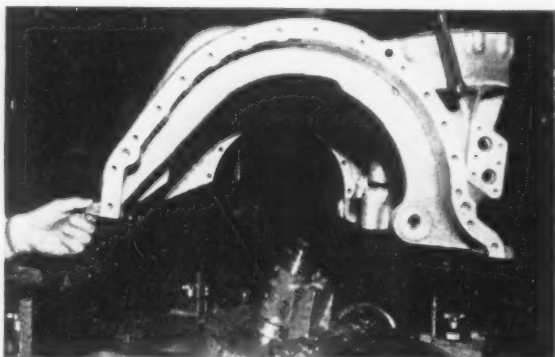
Special fixture includes a Bridgeport milling head for cutting an oil slot inside the rear housing.
